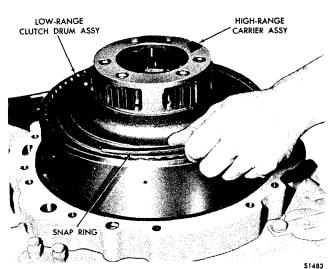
Installing snapring retaining high-range planetary carrier assembly (-3 overdrive model)
